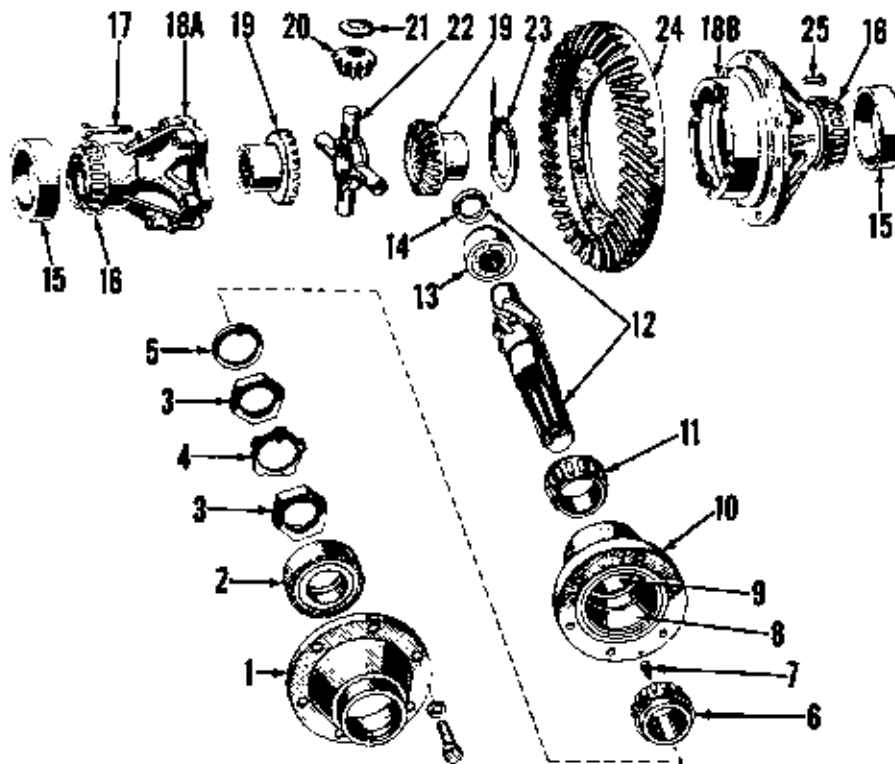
Exploded view of main drive bevel pinion, ring gear and differential assembly.
